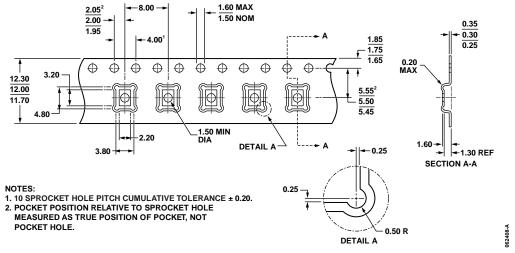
LGA\_CAV Tape and Reel Outline Dimensions Dimensions shown in millimeters
